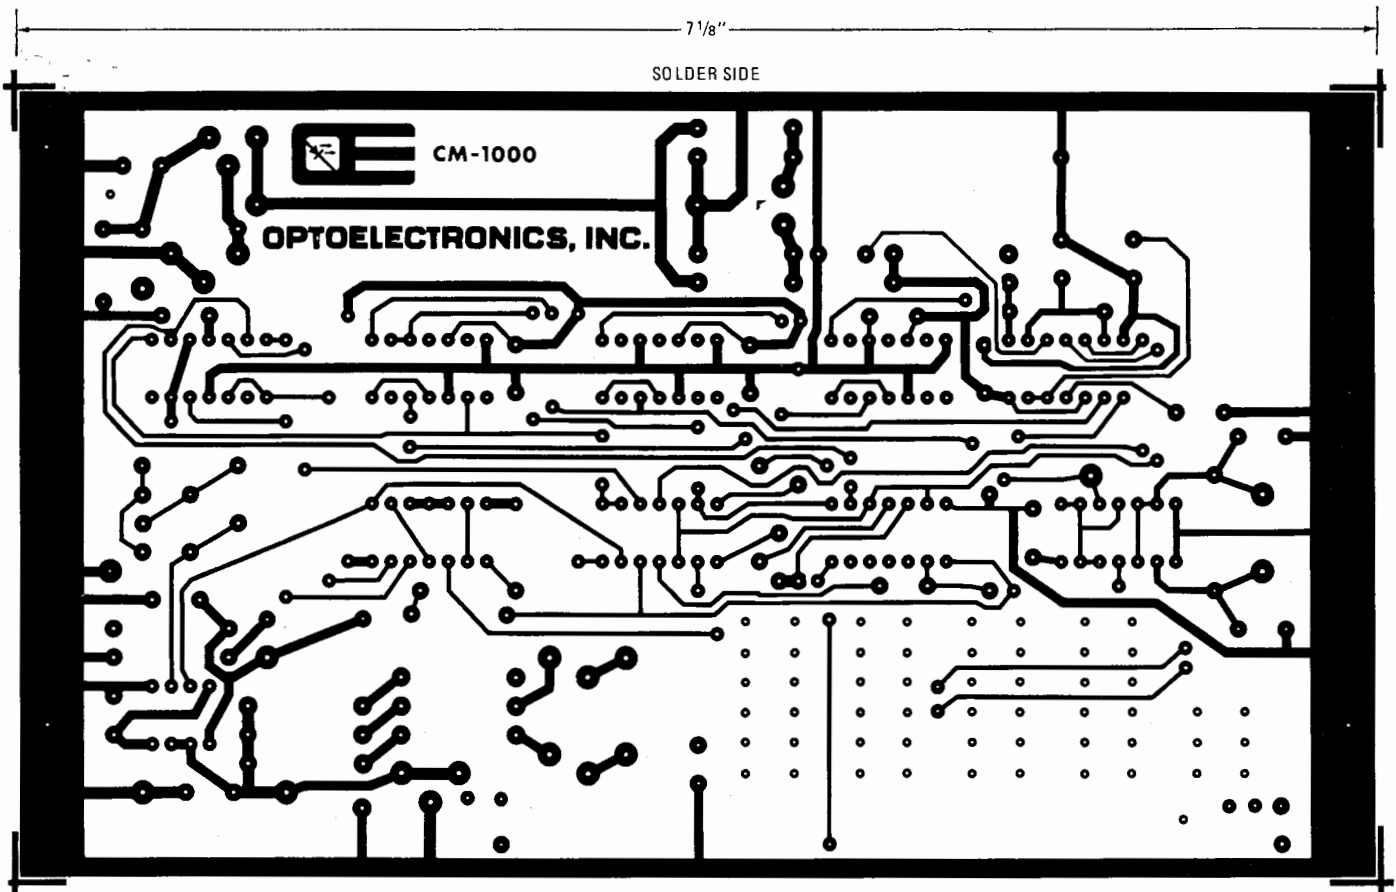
FOIL PATTERN for the bottom (solder) side of the main board.
